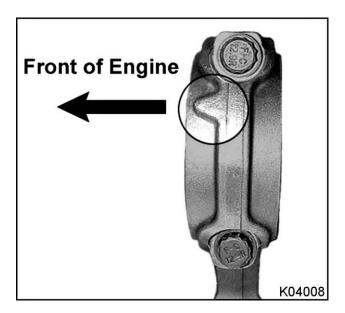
Connecting rod with M12 bolts (mark pointing to front of engine)
